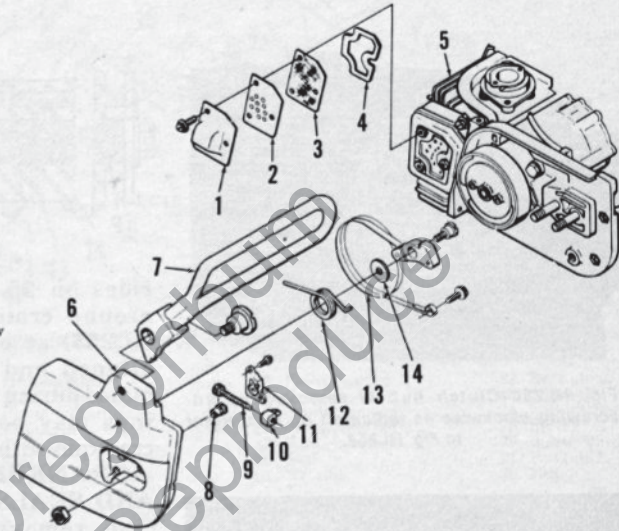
Exploded view of chain brake and muffler on model 350SL Automatic.
